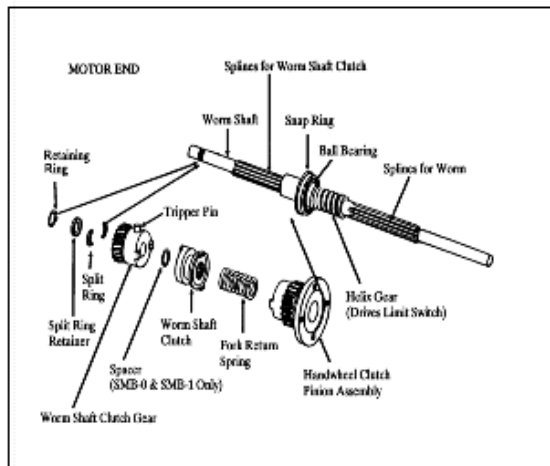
SMB/SB-0 Worm Shaft Exploded View
